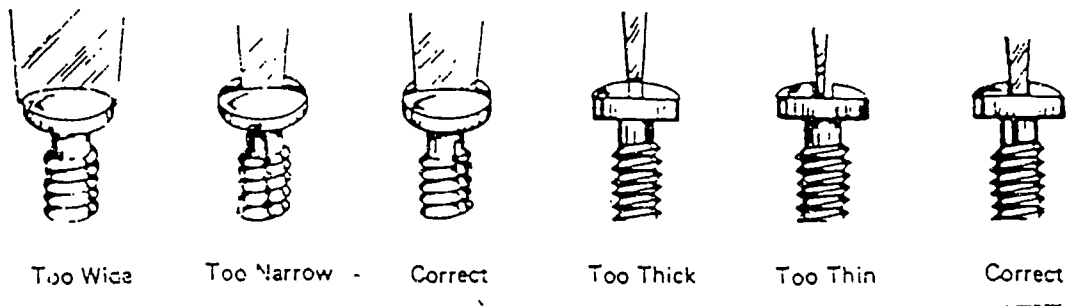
Fitting the Screwdriver Blade to the Screw Head
